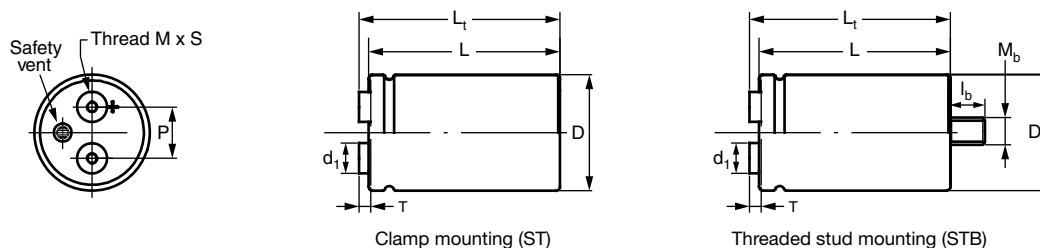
B - High current M6-18 mm disc and 1/4-28 UNF disc: Screw Terminal (ST) and Screw Terminal Bolt nut (STB)
